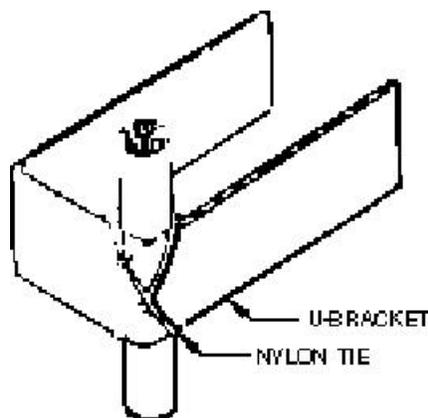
Securing Cable to the Inside of U-Type Brackets
